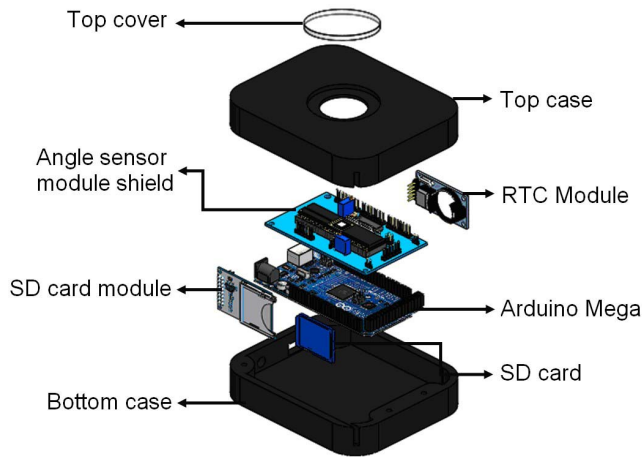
Computer Assisted Design (CAD) model showing an exploded view of the components that compose the PV sub-module.
